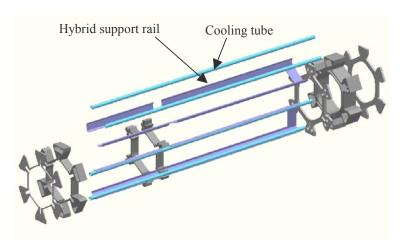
Exploded view of the support and cooling structure for the L0a hybrids. Only a few of the cooling tubes are shown for clarity.
